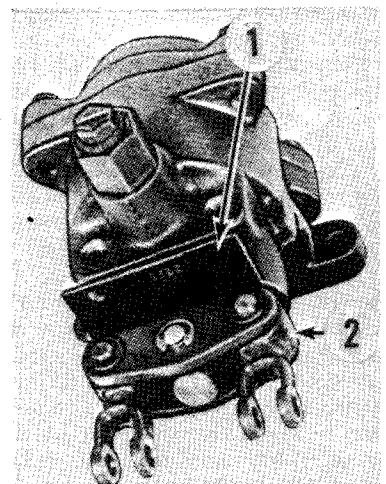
View of Ford brake adjusting tool No. 7446 (1) installed between rocker arm links (2) and valve body. See text for brake adjustment on Model TW-30.
